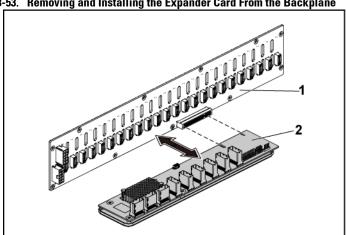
Removing and Installing the Expander Card From the Backplane
